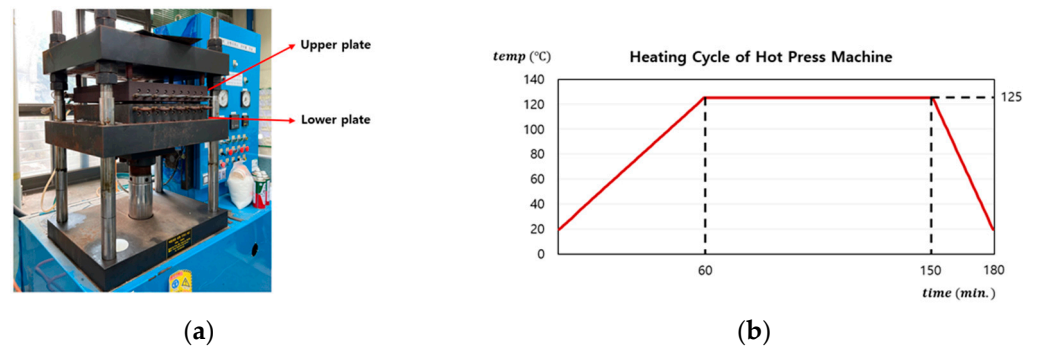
(a) Hot press machine used for manufacturing specimen. (b) Heating cycle for the hot press machine.
